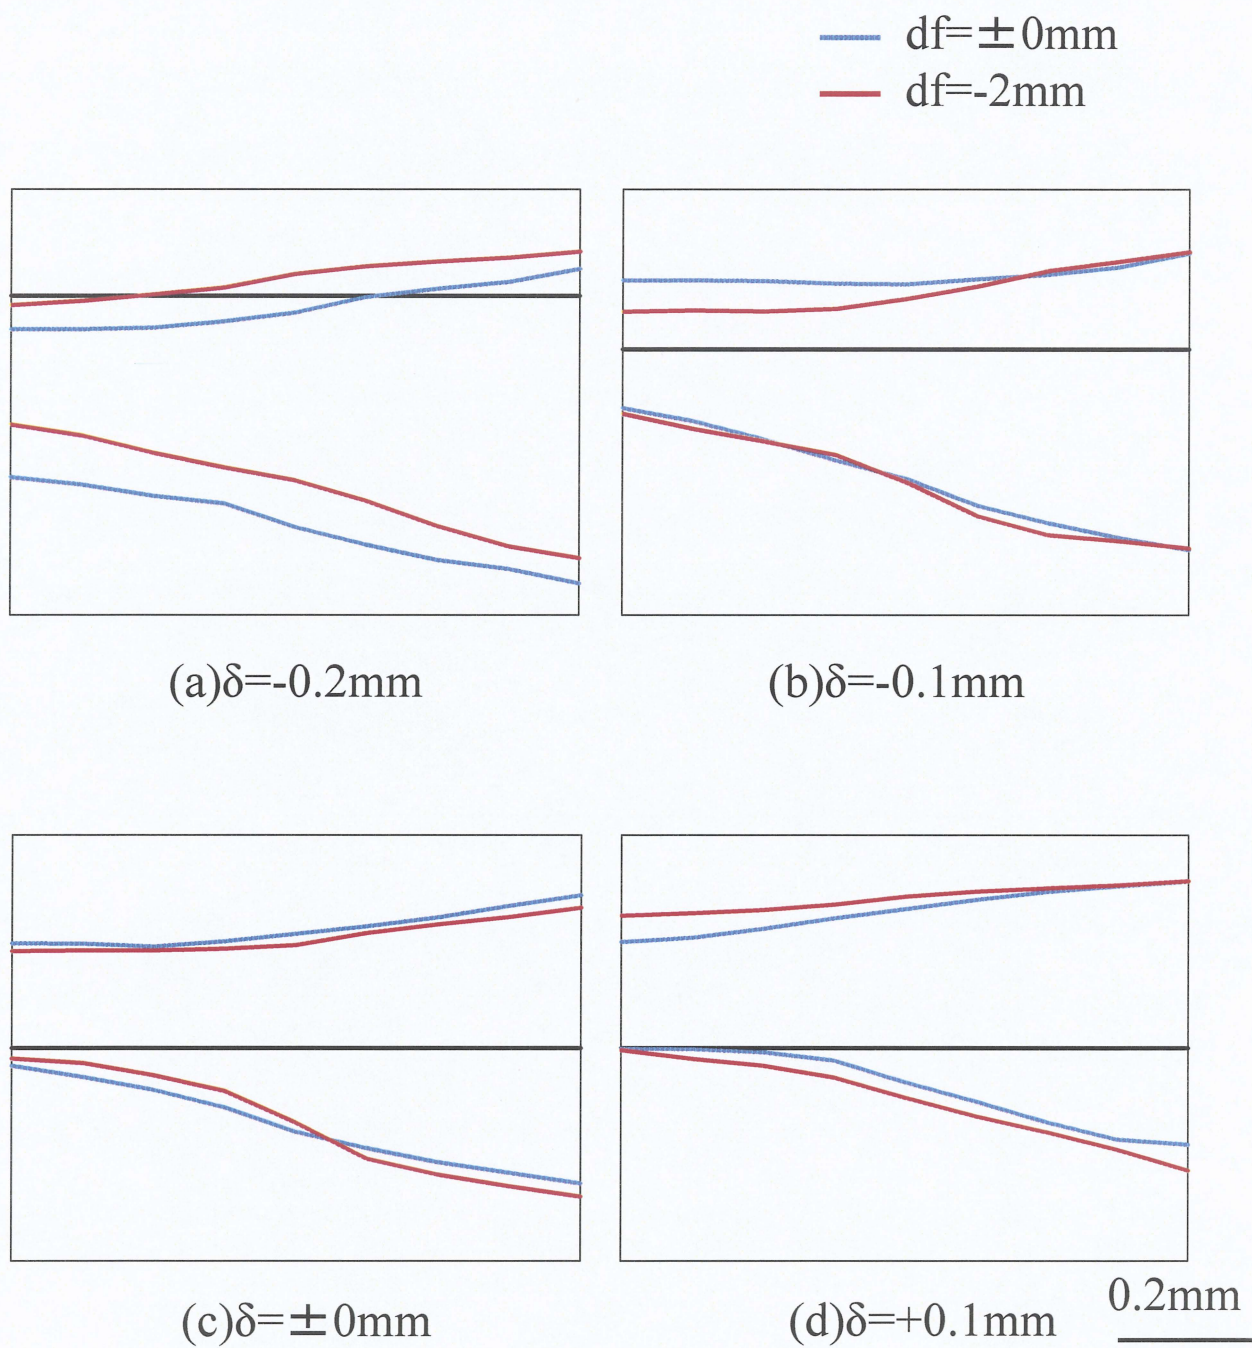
Cross-sectional shape of bead of SUS304 for defocusing distance at welding speed 60mm/s.
